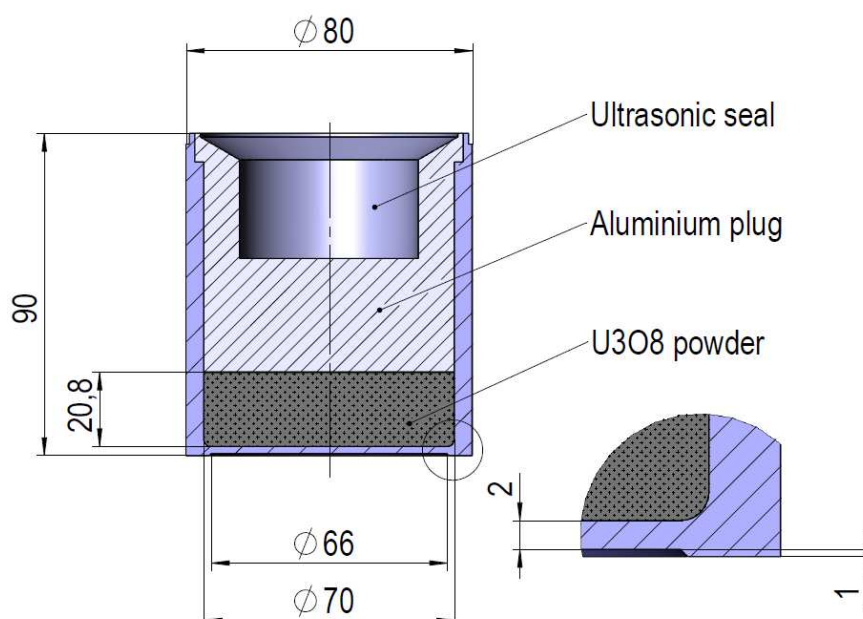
The uranium standard's drawing with nominal dimensions. (Reproduced based on Ref. 3) Filling height/material thickness is 20.8 mm for all samples except CBNM446. For CBNM446 it is 15.8 mm. The can material is Al-alloy ASTM 6061-T6.
